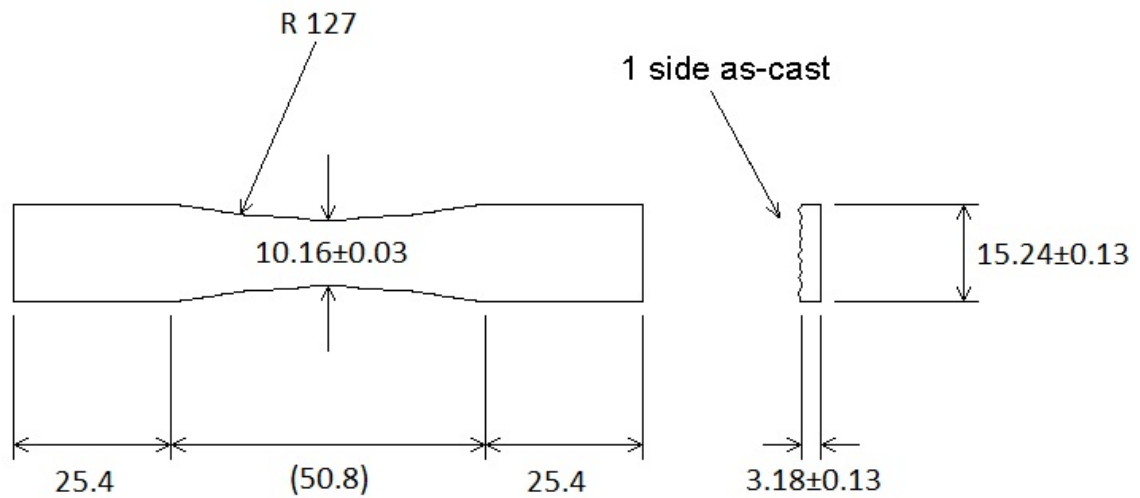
Fatigue test specimen with as-cast surface. All dimensions in mm.
